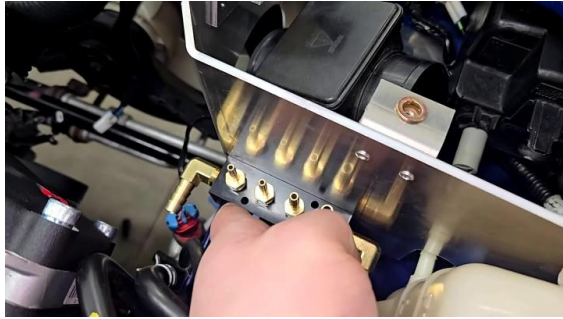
IAC Valve and supplied bracket installed on the driver-side firewall.
